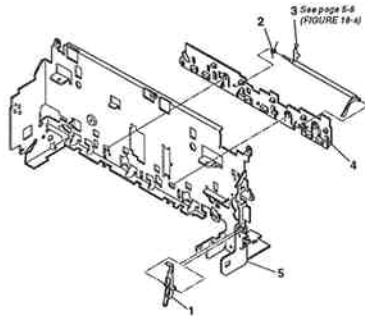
PAPER FEED SECTION (2) & CARRIAGE GUIDE FRAME
